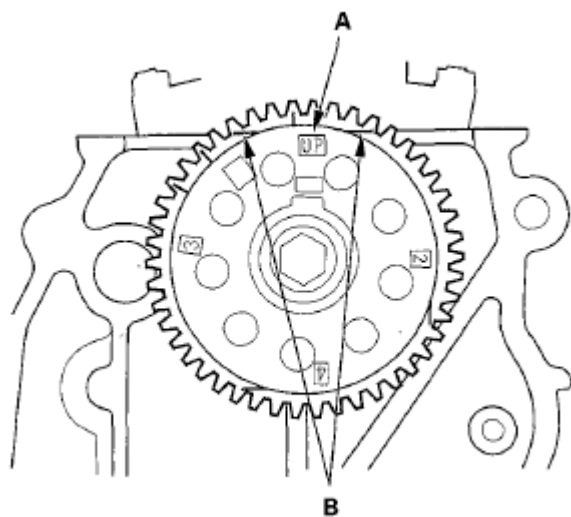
Identifying UP Mark On Camshaft Sprocket
